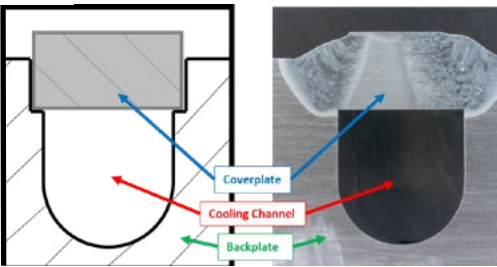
Diagram of unwelded cross-section (left) and example of an acceptable welded cross-section (right).
